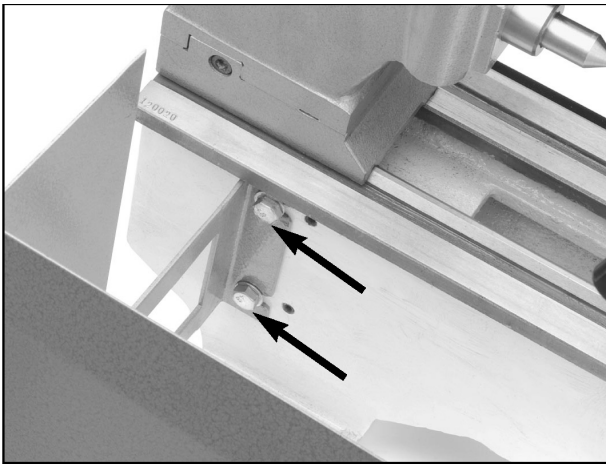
Two hex bolts / washers secure the right-hand side of the back splash to the lathe.
